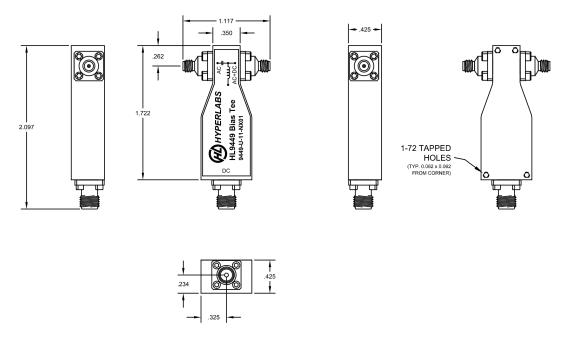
HL9449 with SMA DC bias port Mechanical Drawing
